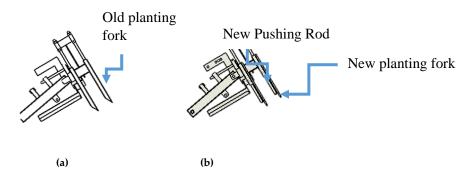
(a) Design of Old Planting Fork (b) Desain of New Planting Fork
